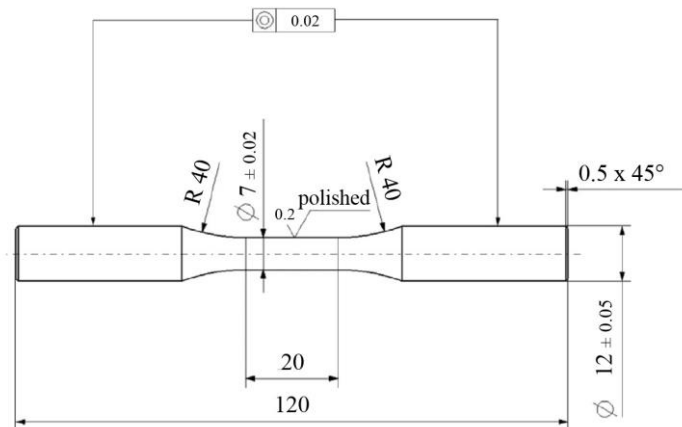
Geometry of TMF samples, dimensions in mm (Paper III).
